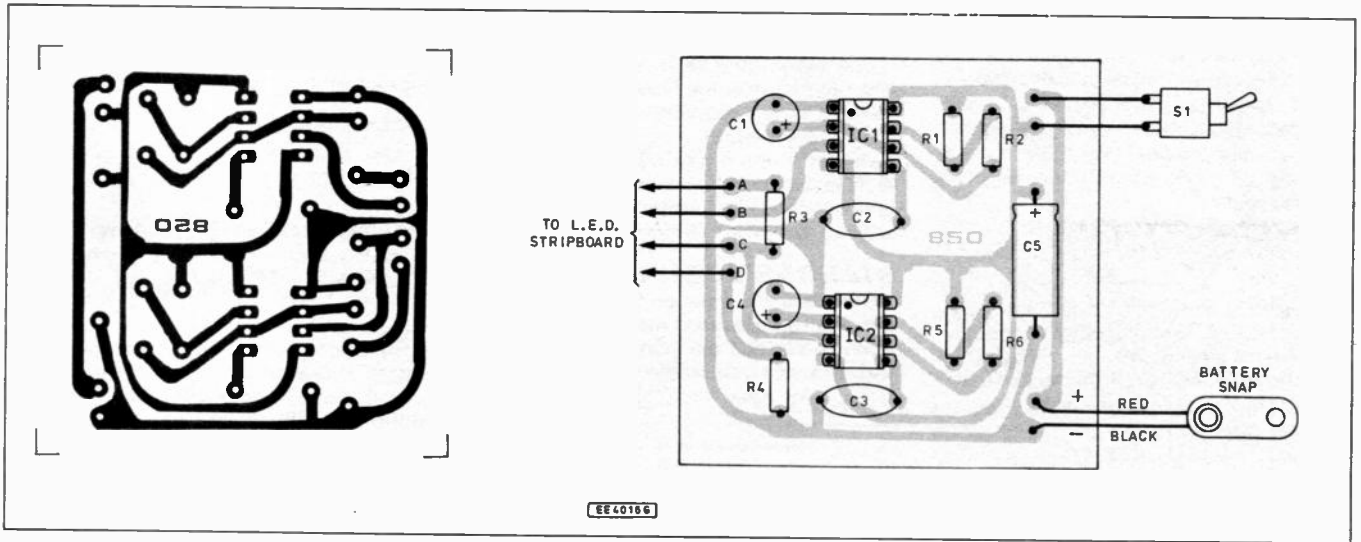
Printed circuit board component layout and full size copper foil master pattern.
